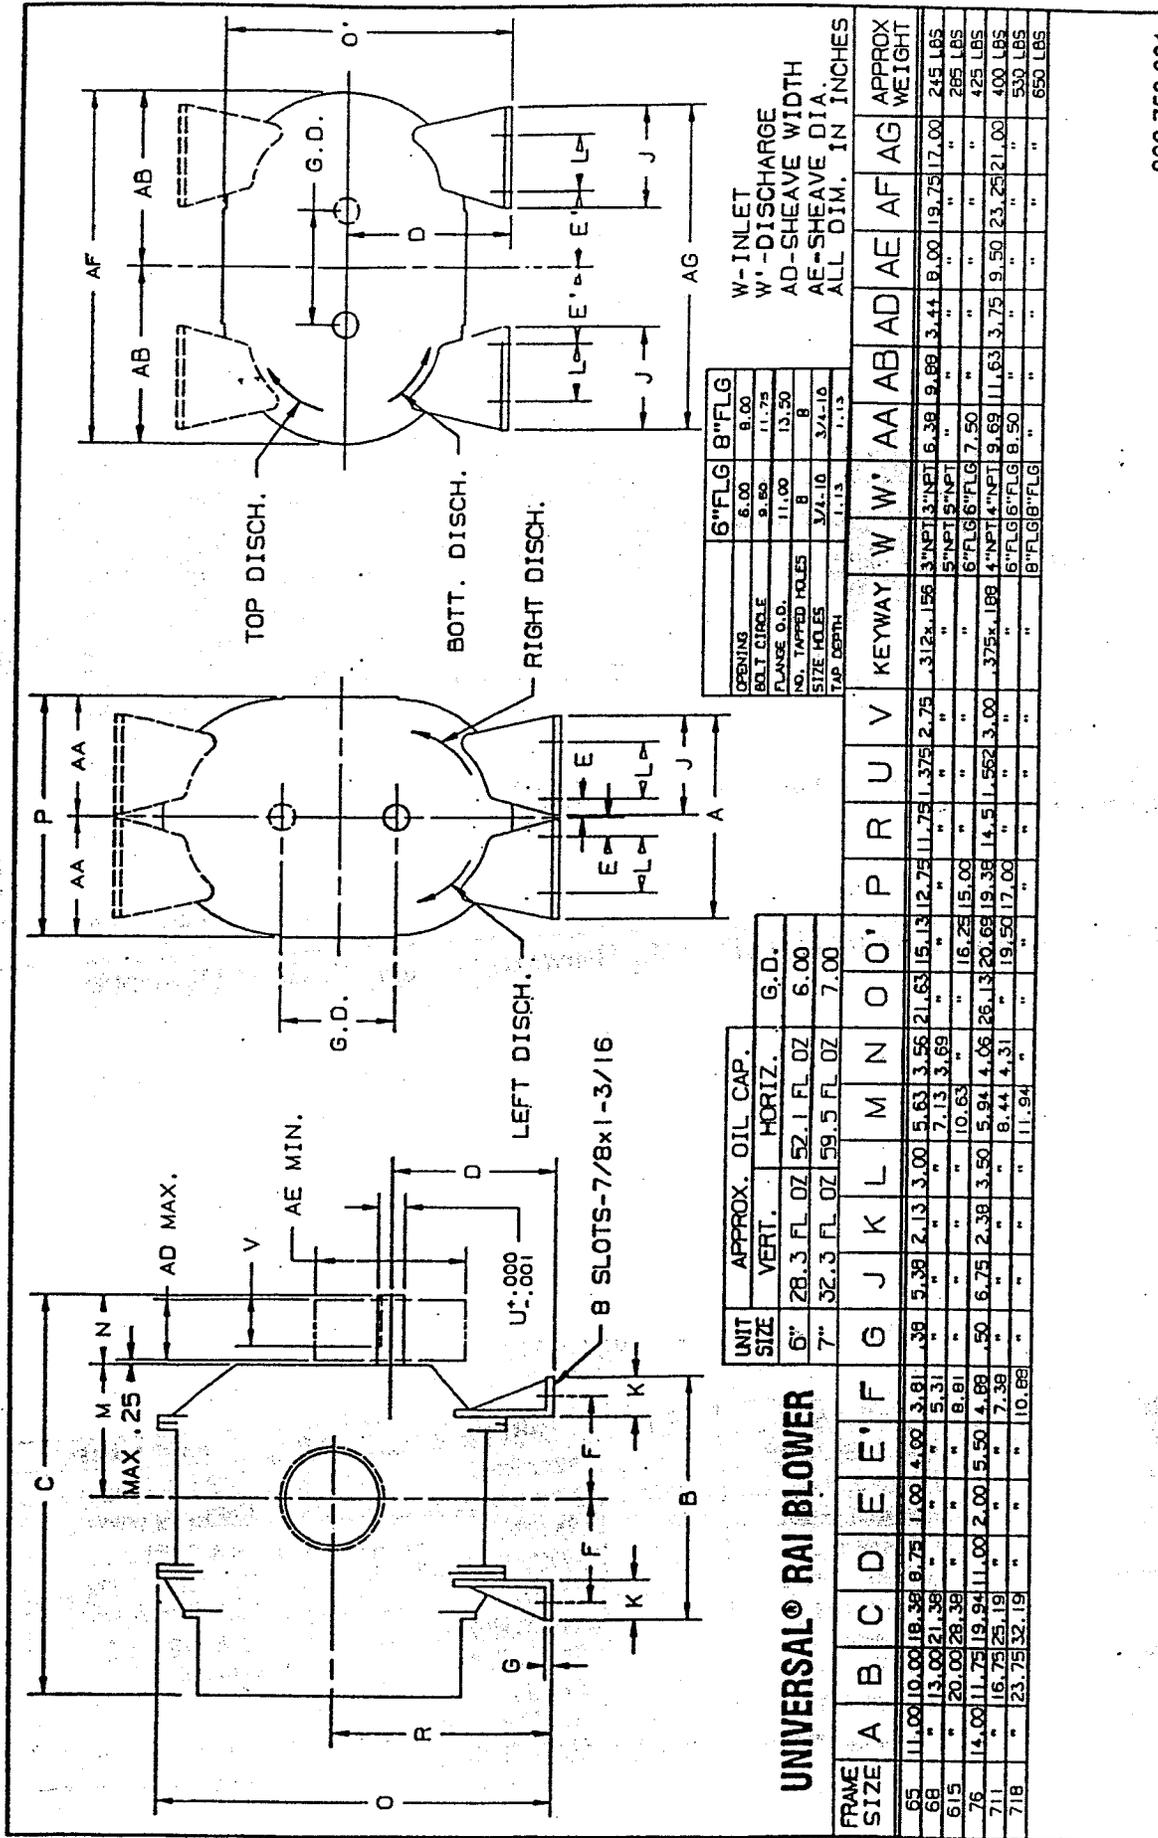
Assembly of Universal® RAI Blowers, 6" and 7" Gear Diameter
